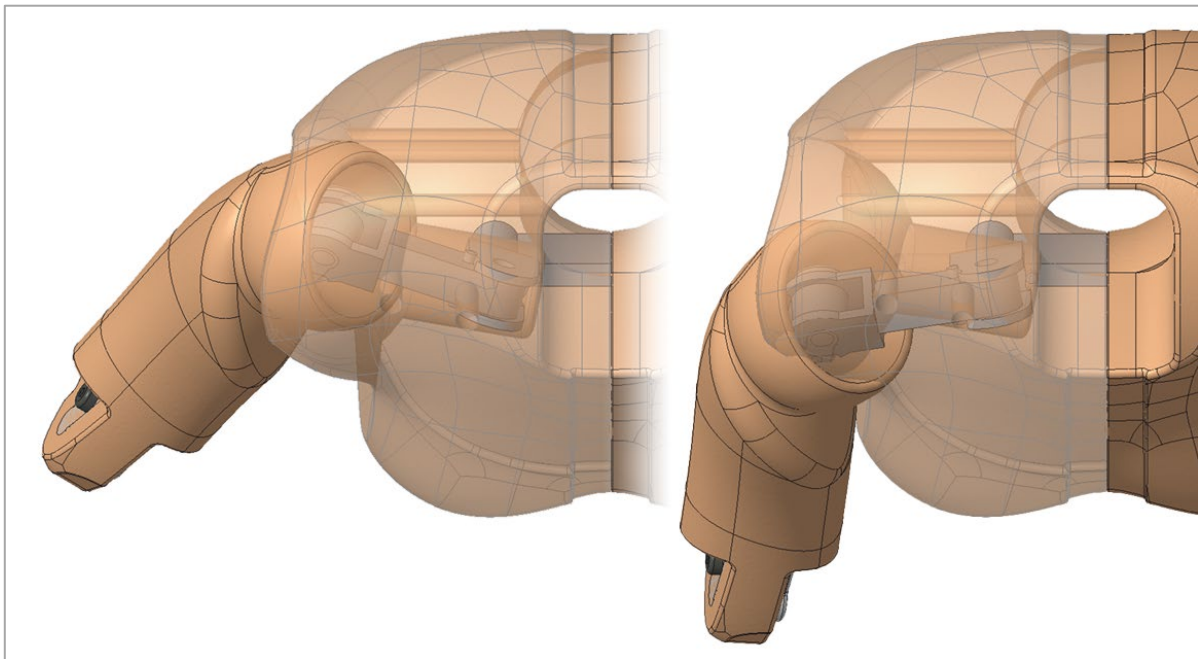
Shoulder concept I: Fully movable shoulder joint.
